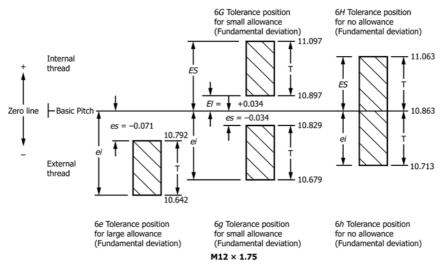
Metric Tolerance System for Screw Threads
